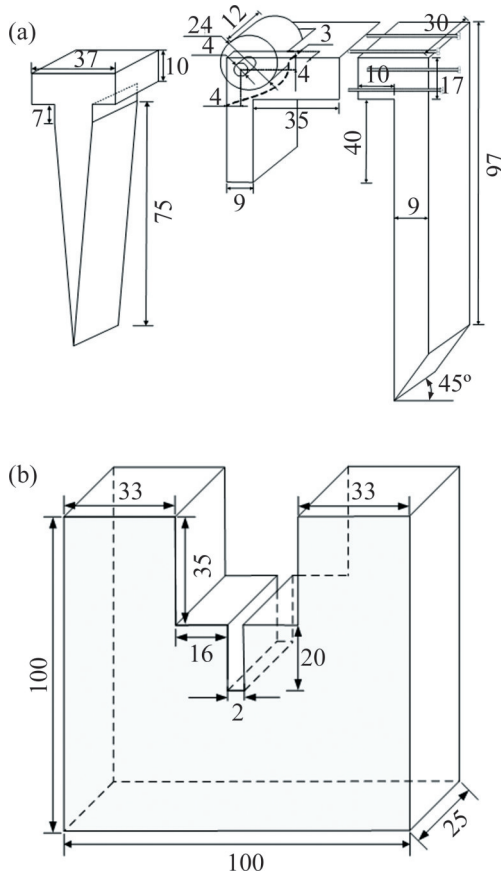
Rock crack directional propagation test device and specimen dimensions diagram (unit: mm): (a) Clamping device size; (b) Specimen size diagram
